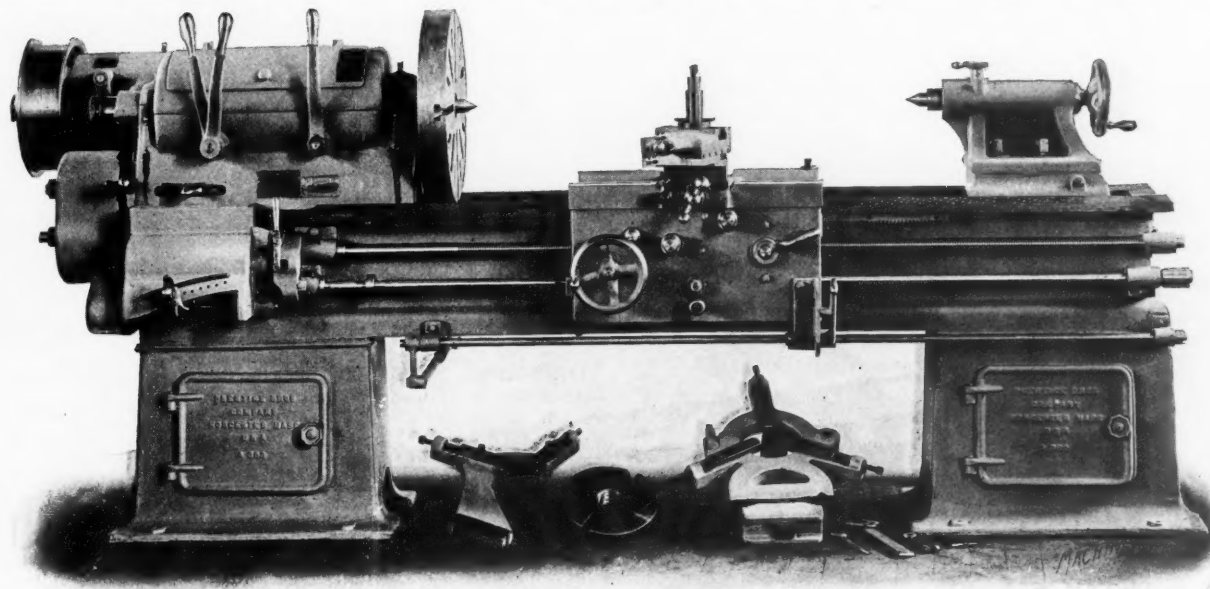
Reed-Prentice 20-inch Geared-head Lathe
